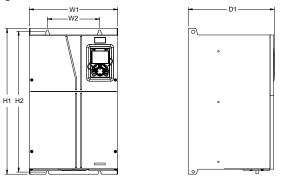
Wall-mounting diagram for 660V 22-132kW models
